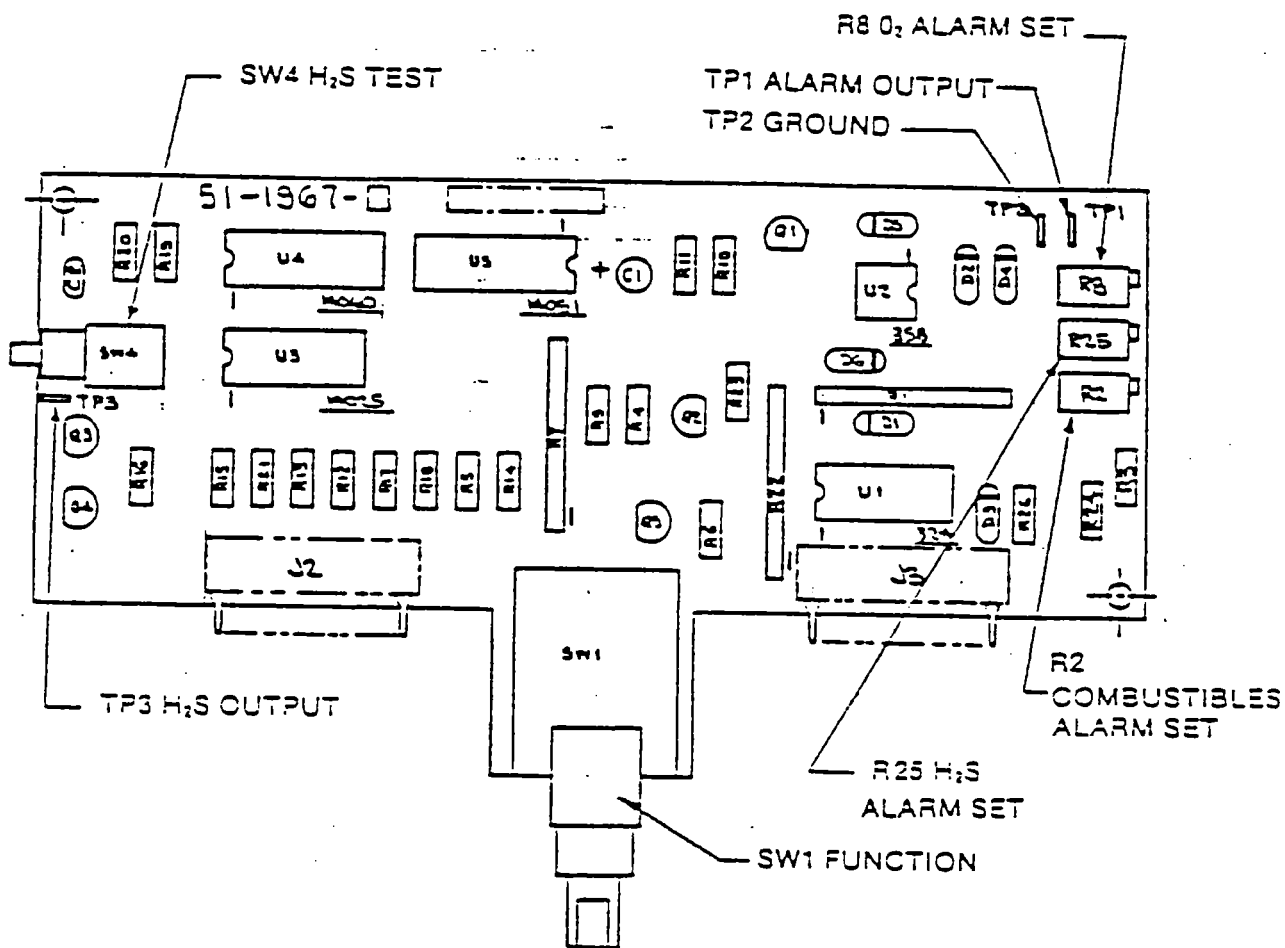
Switch Board Test Point, Switch, and Potentiometer Layout
